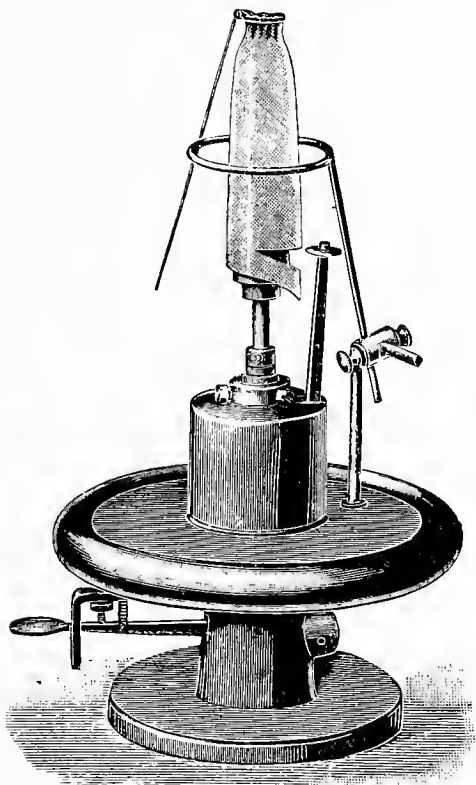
Machine for Trimming Upright Mantles,  $\frac{1}{4}$  Actual Size.
